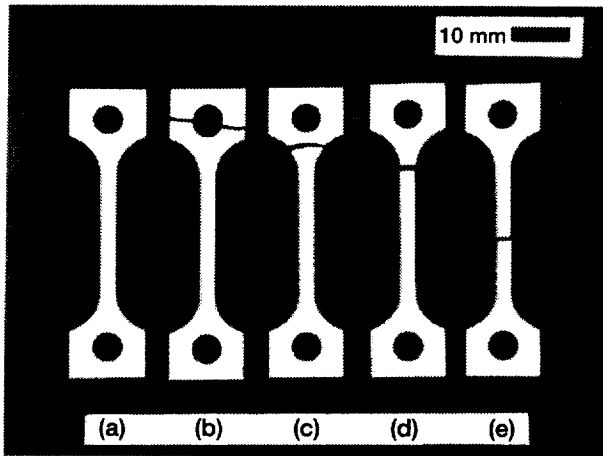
Summary of different modes of failure for tensile test specimens: (a) Original (untested) test specimen; (b) Pin-hole failure in the fixed single-pin loading system; (c) Shoulder-region failure in the fixed double-pin loading system; (d) Transition-region failure; (e) Normal, gage-section failure in the fixed double-pin loading system.
